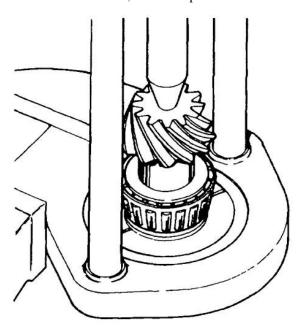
Installation of the Pinion Shaft Inner Bearing Cone
